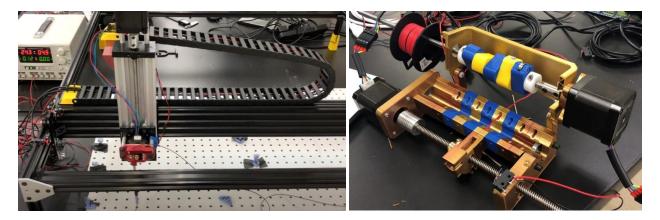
Left*: Machine configuration used for demonstration harness routing with extruder attached directly to z-axis carriage. *Right*: Unpowered wire switcher demo configuration with missing drive shaft and reduced wire capacity due to design error.
